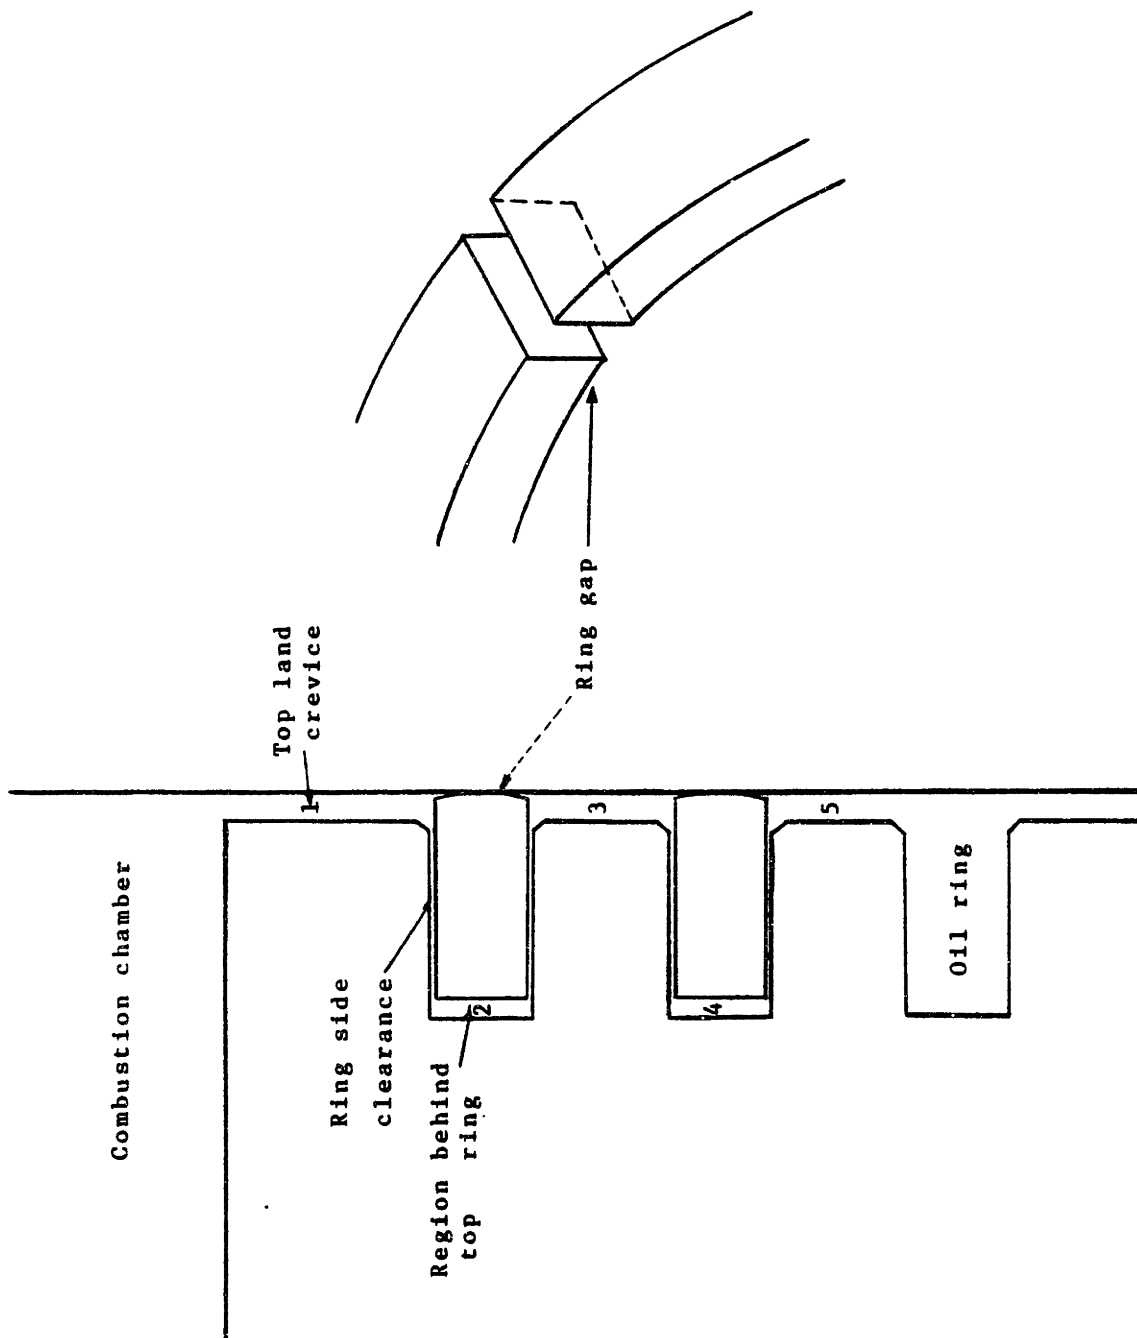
Schematic of a conventional piston ring assembly showing the possible gas passages.
